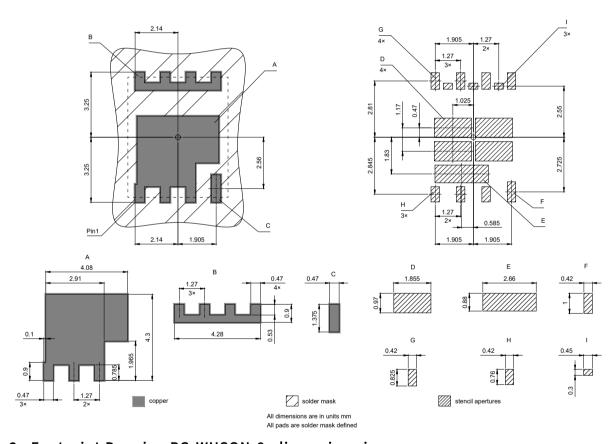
Footprint Drawing PG-WHSON-8, dimensions in mm
